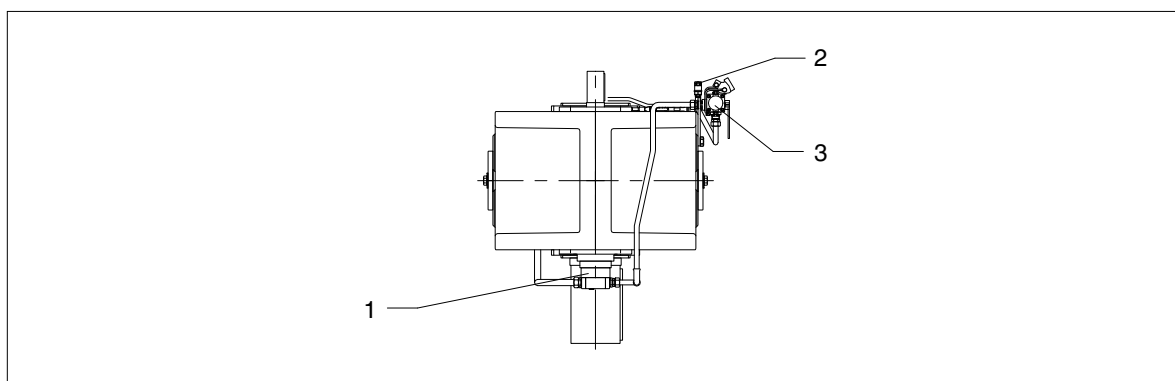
Add-on oil-supply system with flanged-on pump in case of type H..V
